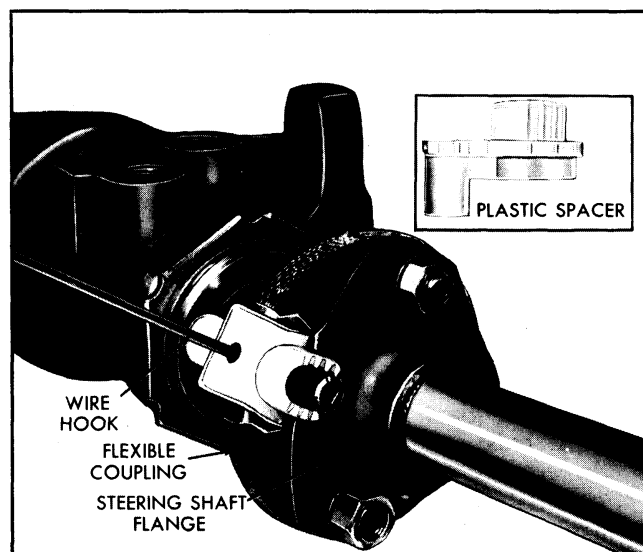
B-123—Removing Plastic Alignment Pin Spacers—Nova and Corvette
